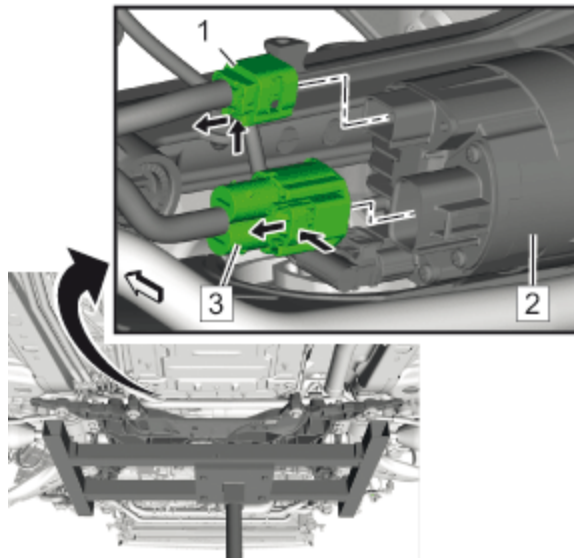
Power Steering Assist Motor And Electrical Connectors
